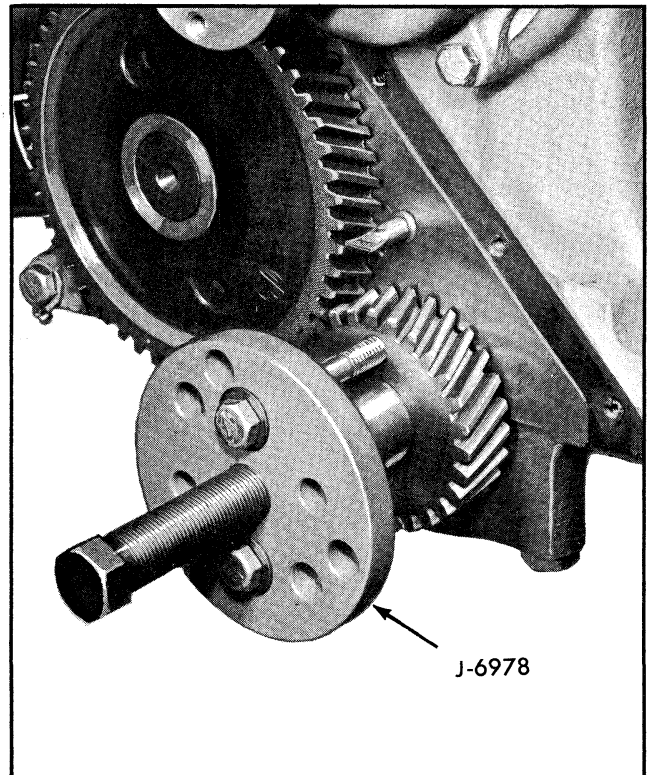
Tool J-6978 Installed for Removing Crankshaft Timing Gear
